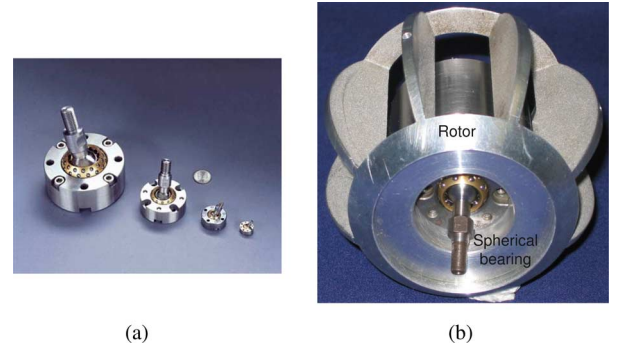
Implementation of spherical bearing on the rotor. (a) Spherical bearing [16]. (b) Spherical bearing at the rotor center.
